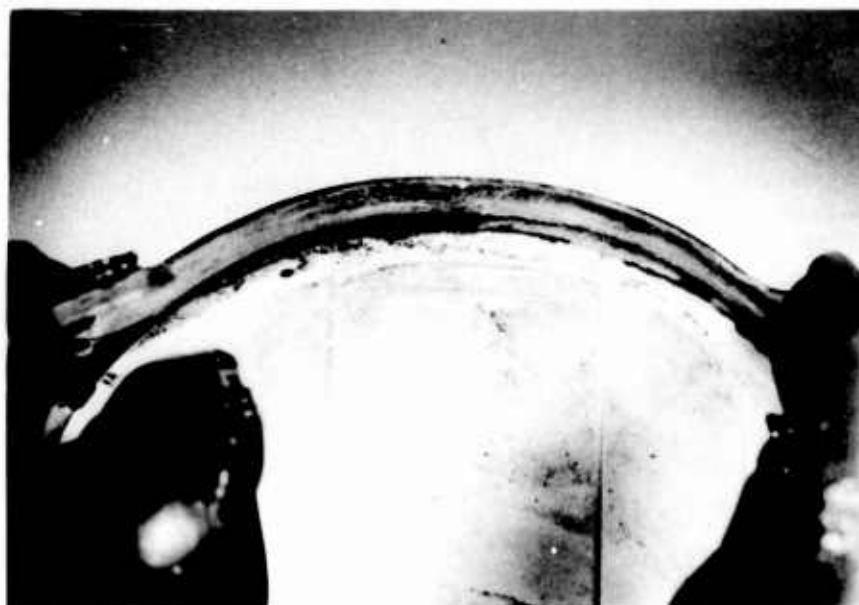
Photo of Frontal Edge of APH-5 With Edge Roll Removed.
